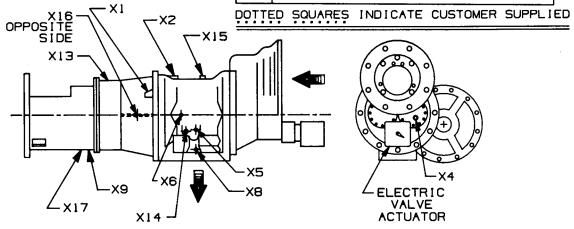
Water Cooled High Stage Gear Drive With Electric Valve Actuator
